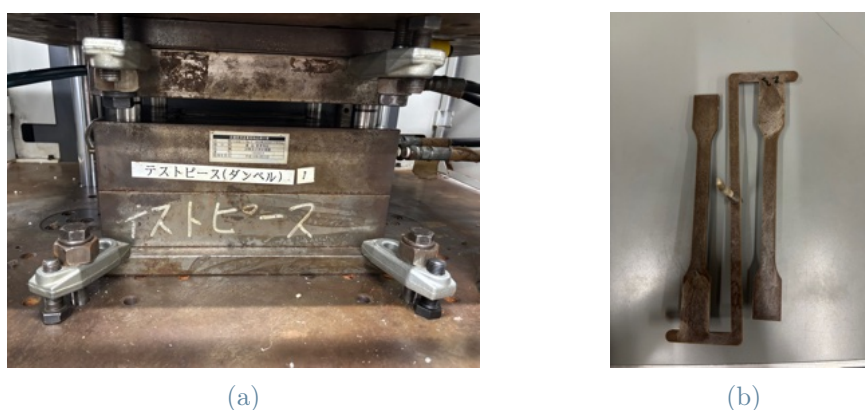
Injection molding mold: (a) mold overview; (b) as-molded dogbones.
